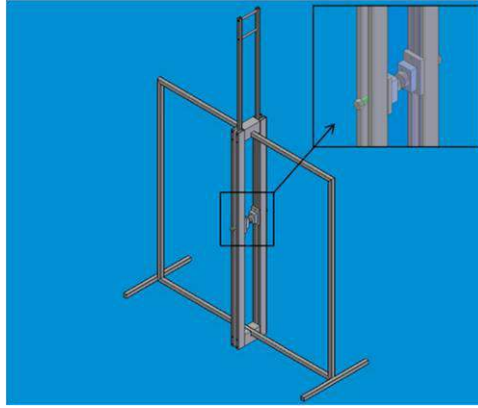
Holding equipment for 1x1m plates and pseudo-defects.
